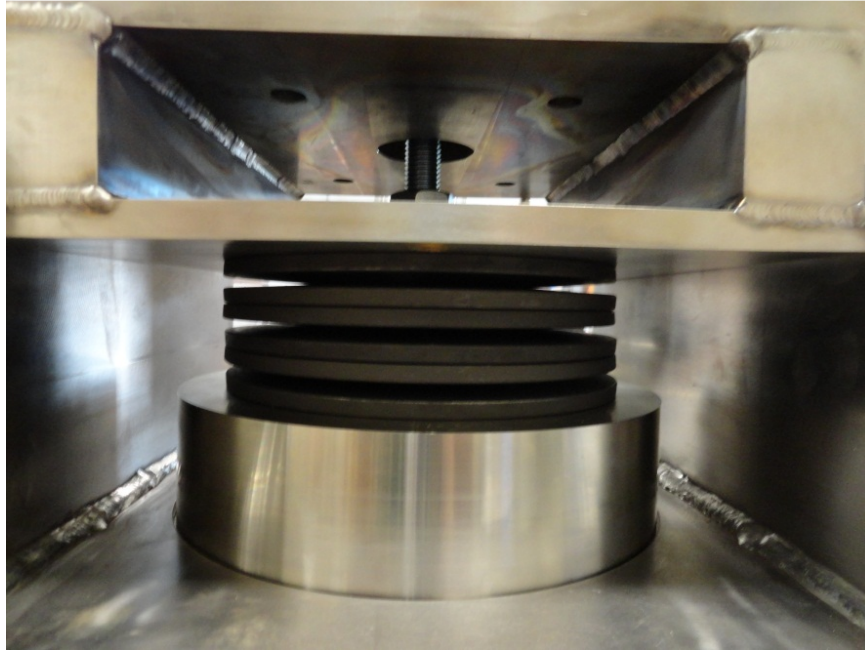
The spring pack is first loaded in compression and eventually the nut on the tie-rod is tightened so that the spring maintains a length of 2.5 inches.
